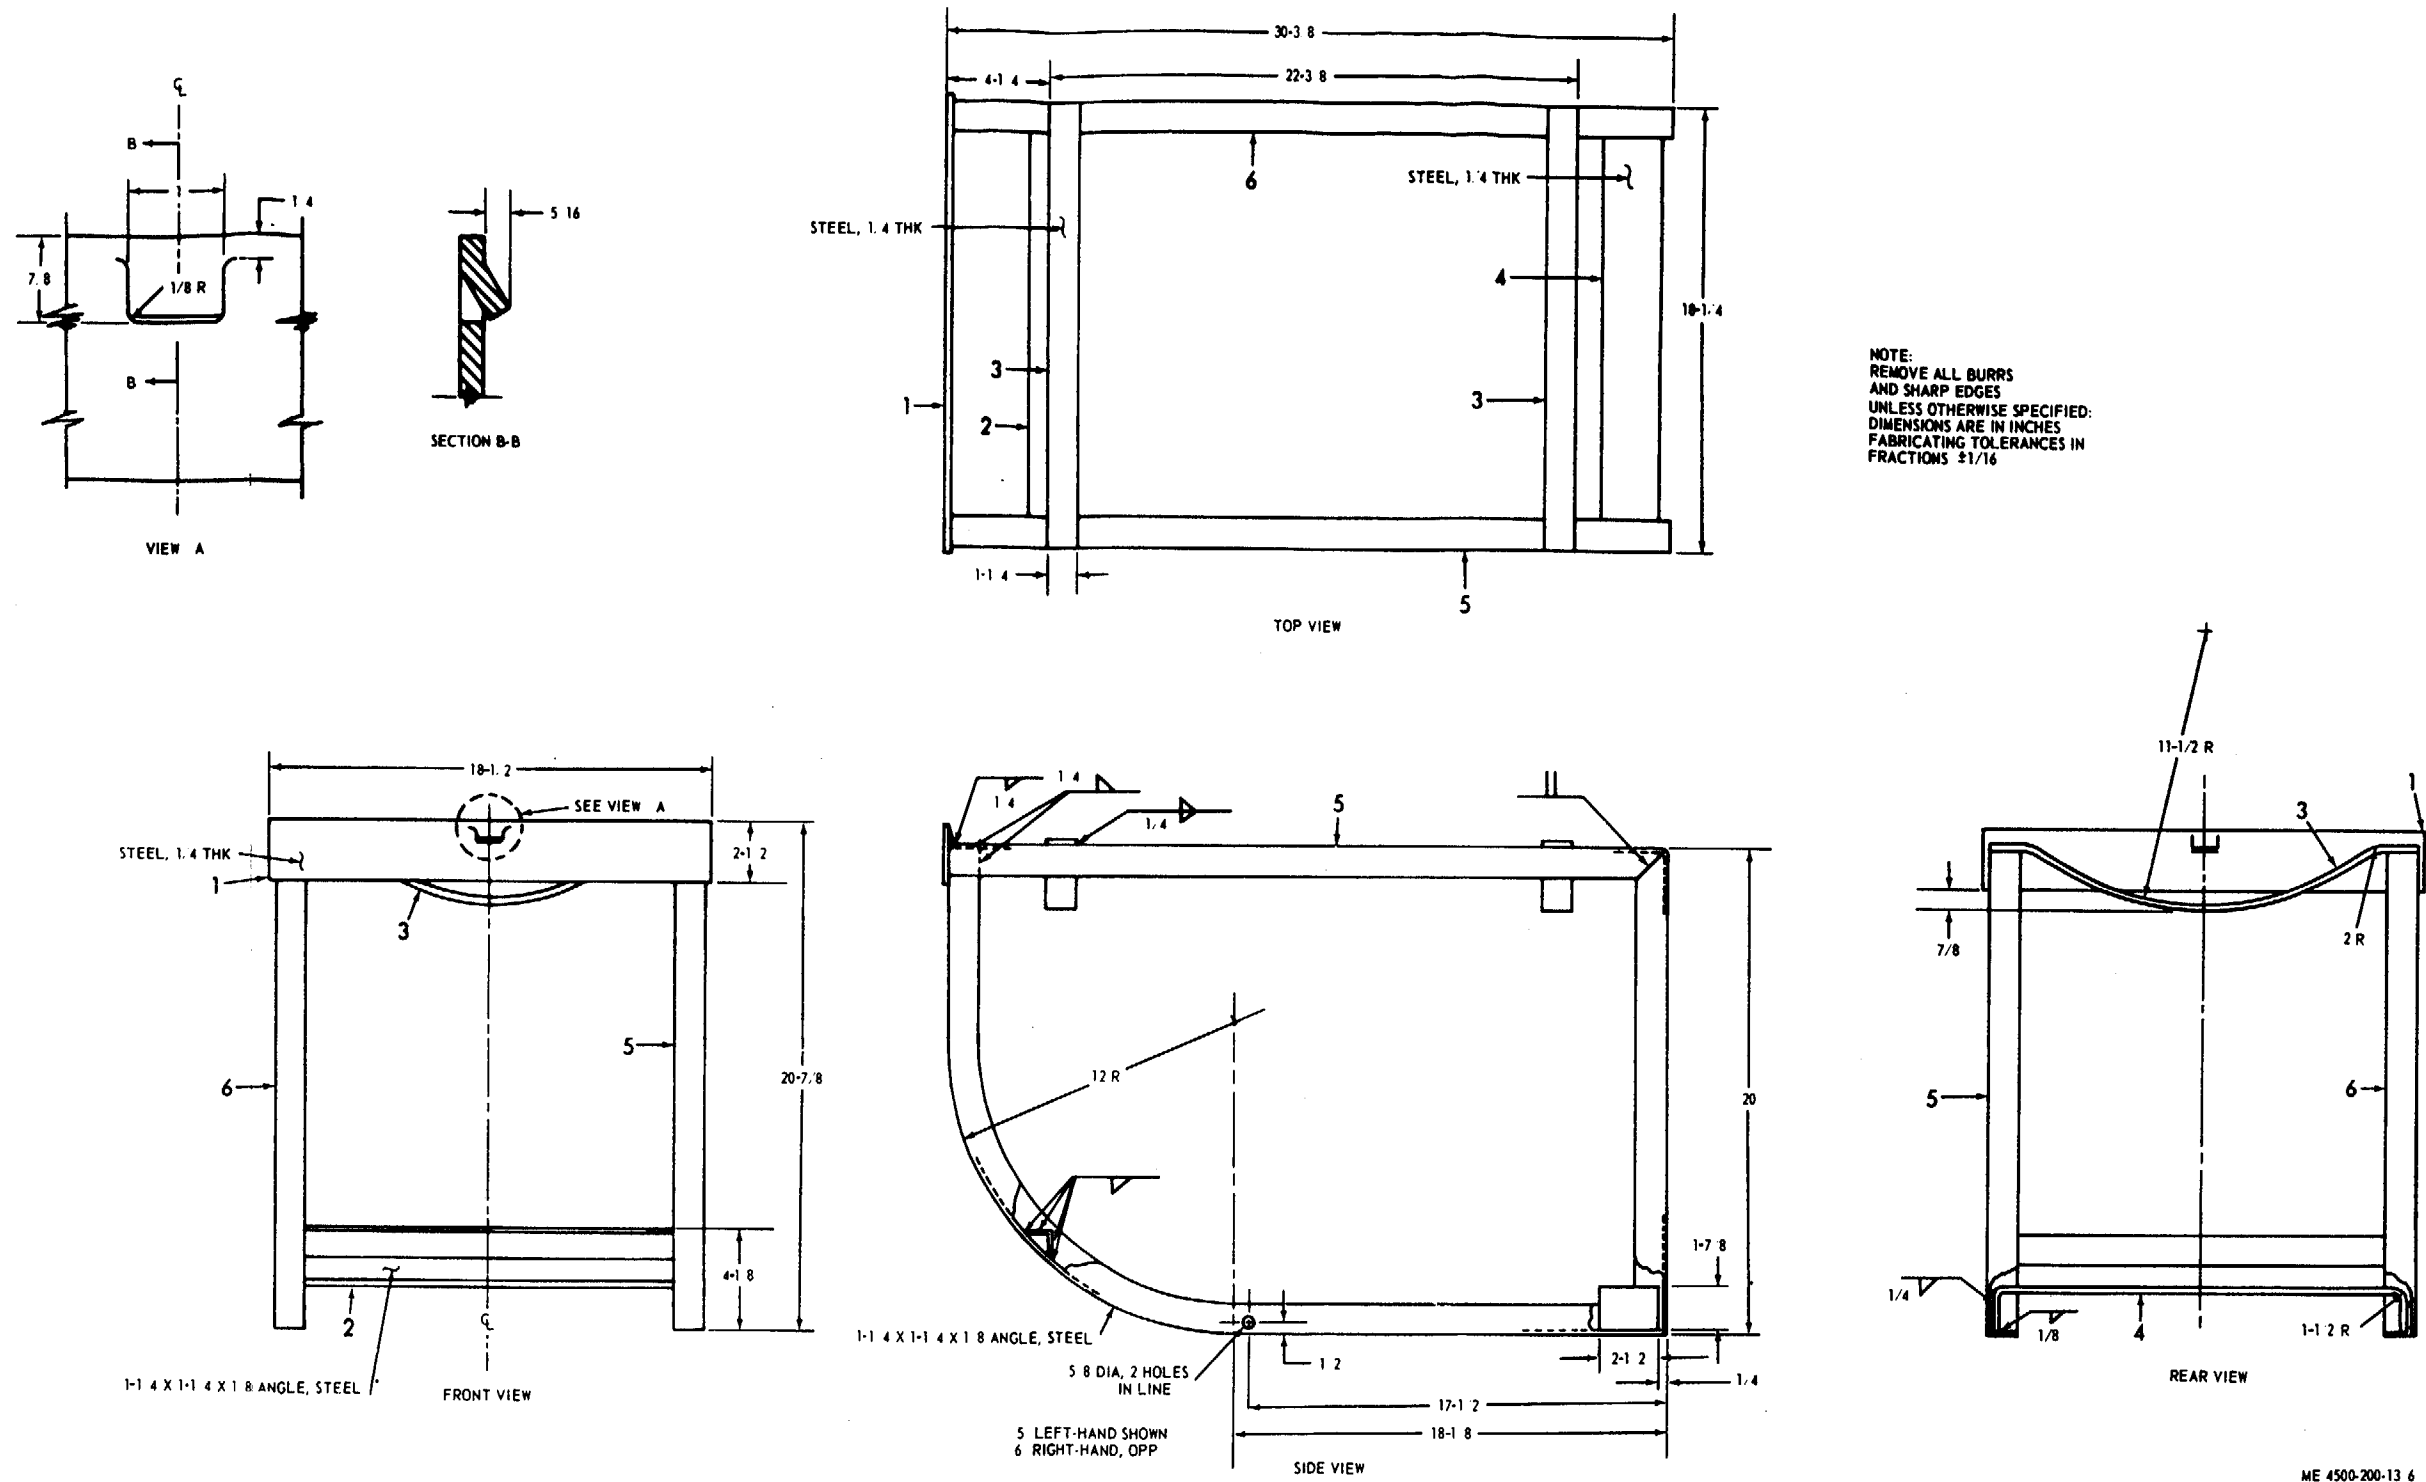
Fabrication and assembly of 55-gallon drum stand, style B.
